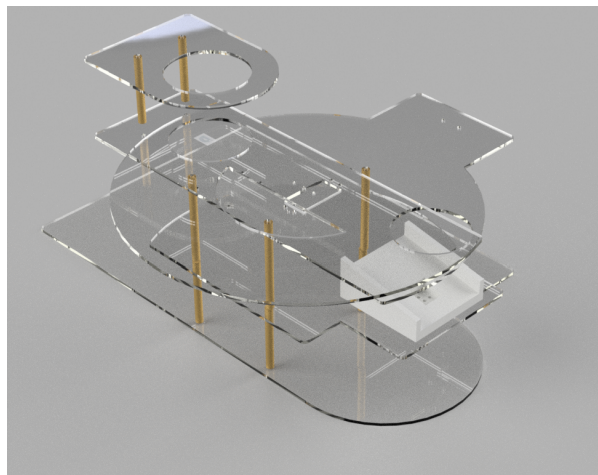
Assembled CAD rendering added in the revised Mechanical Structure subsection.
